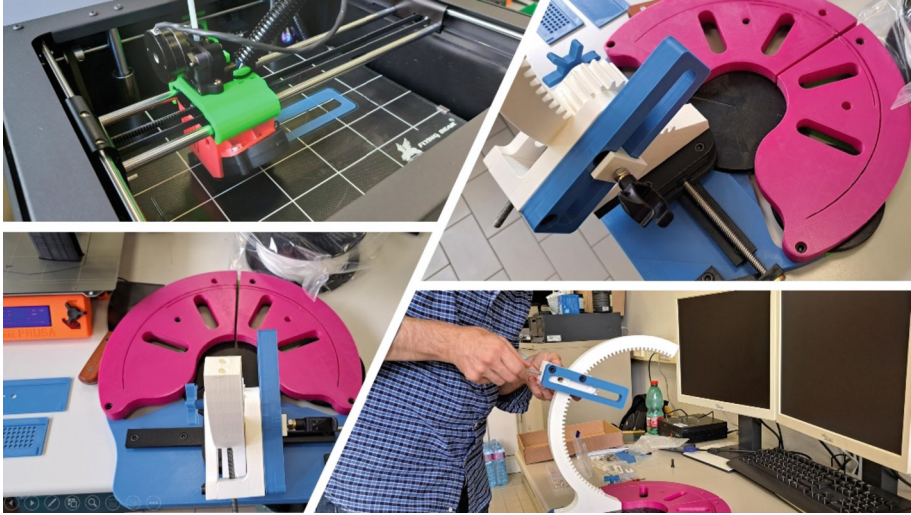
3DINO SYSTEM prototype manufacturing and assembling.
